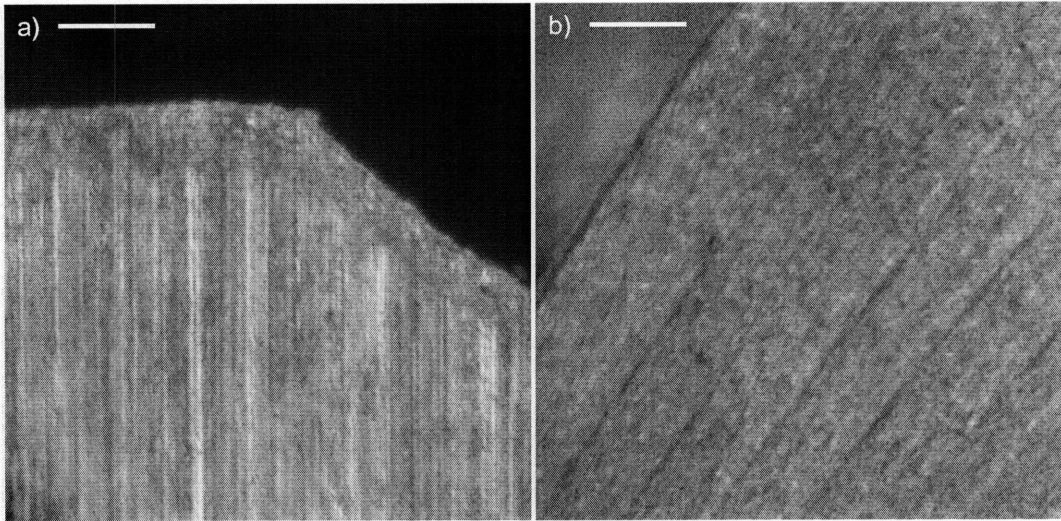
a) Photograph of a 1/4 inch end mill cutter and b) corresponding mold surface. Scale bar is $100\mu\text{m}$. Vertical lines in the end mill cutter photograph are tool imperfections due to grit size of the grinder used to make the tool. These create a serrated edge on the cutting surface, which is transferred to the mold.
